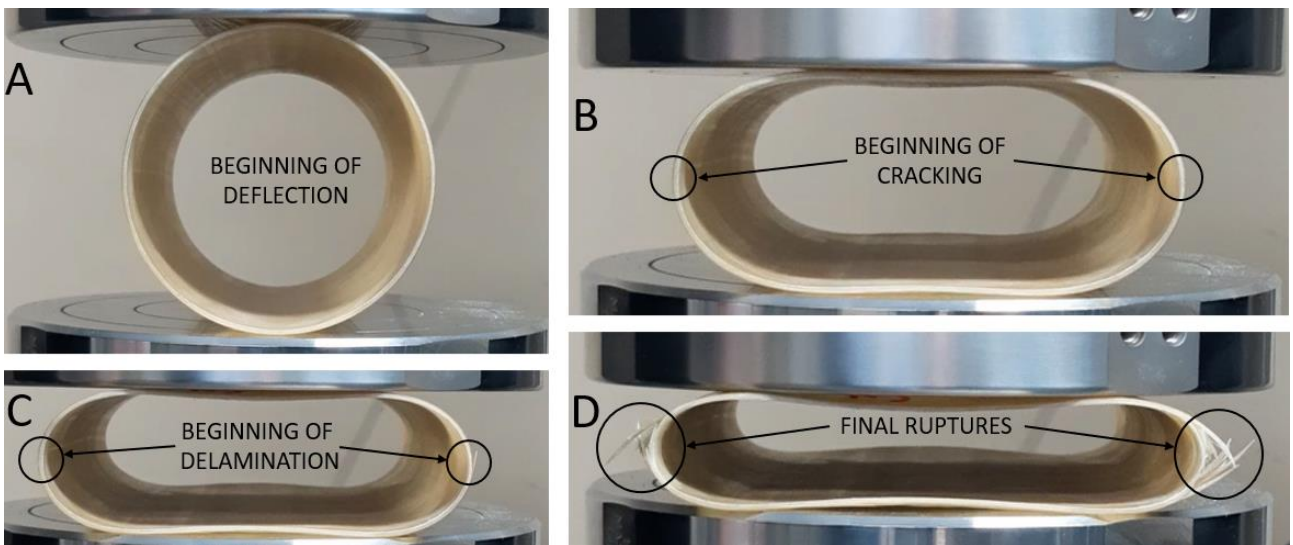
A) start B) cracking C) wall cracking and delamination D) of the samples under radial compression.
